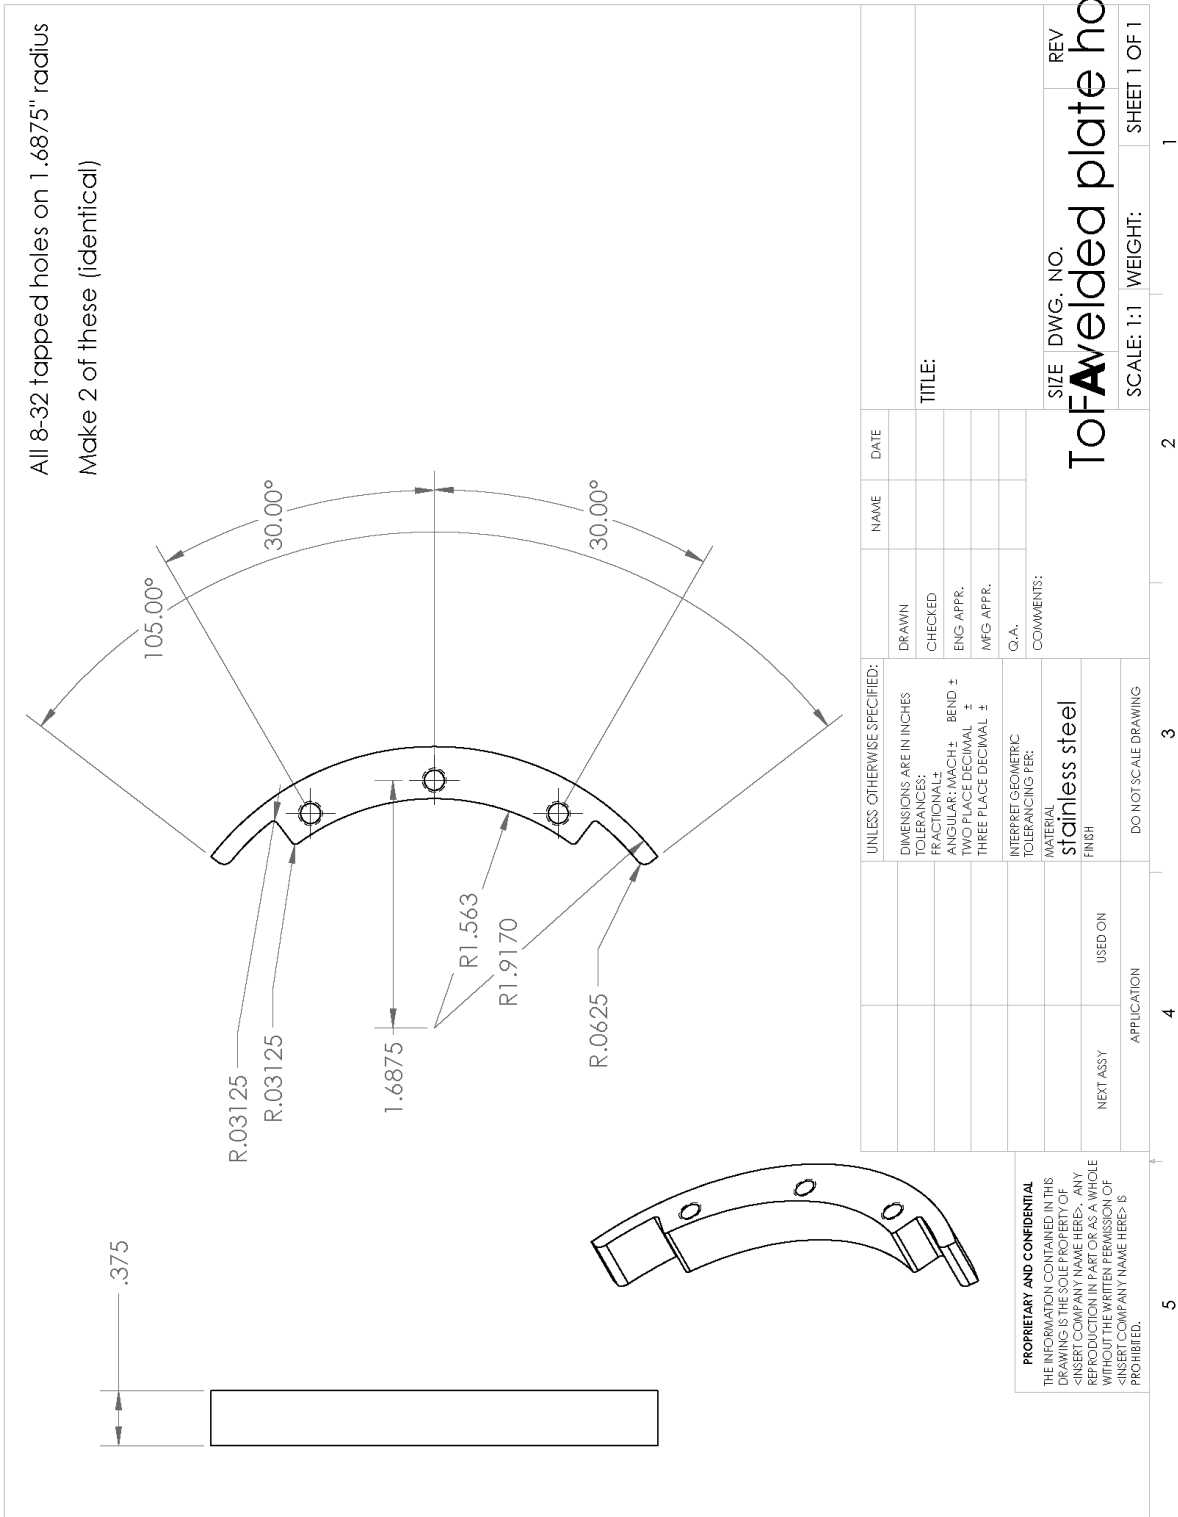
Collars for welding inside the flight tube serving as mounting points for the front of the decelerator assembly.
